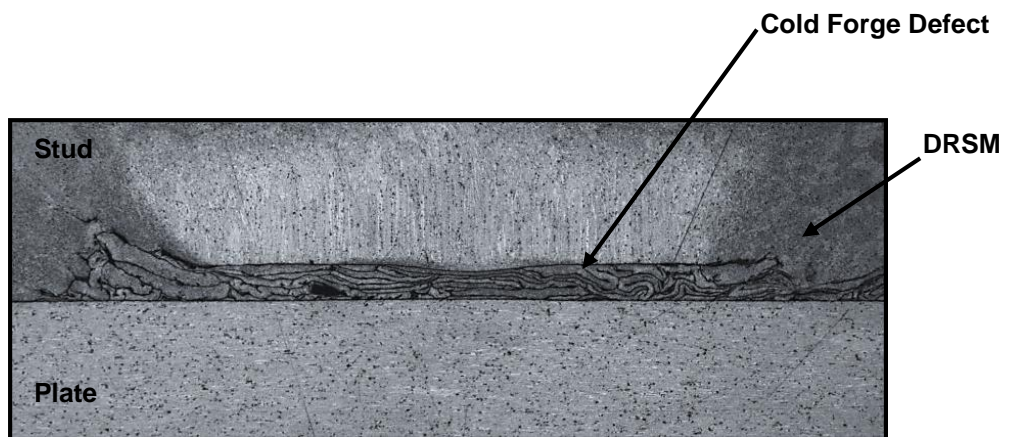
Cold Forge Defect found in Weld TW-22 (similar to weld TW-23) (Located at b-b in Figure 4-28)
